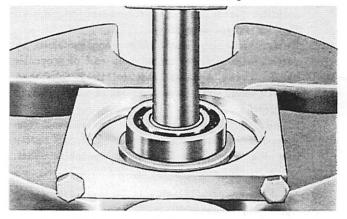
Removing Ball Bearing from Reverse Gear 9. Remove "O" ring from carrier.
